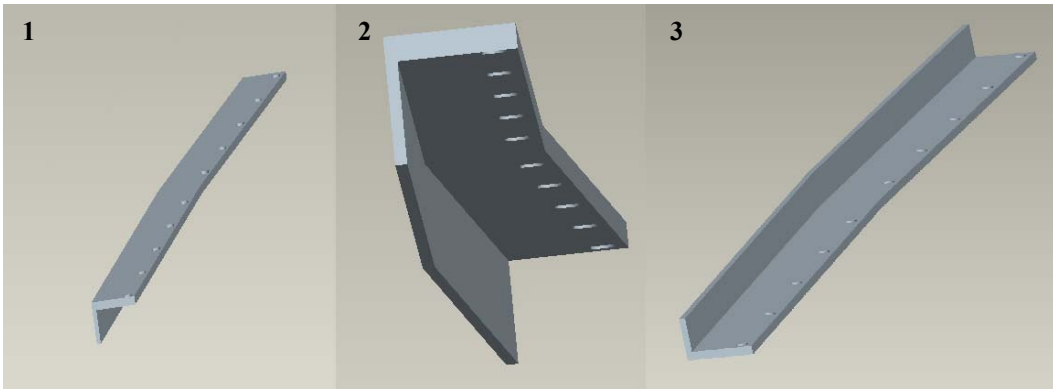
Individual Support Strut Showing Cross Section and P-H Angle
